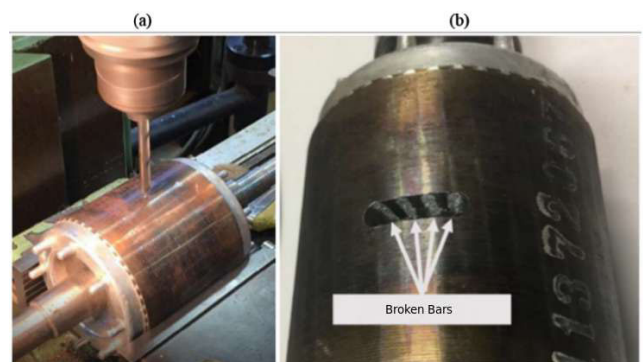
Procedure for inserting the broken bar defects into the rotor: (a) positioning the bench drill in the center of the rotor, (b) detail of the rotor with four adjacent broken bars [55].
